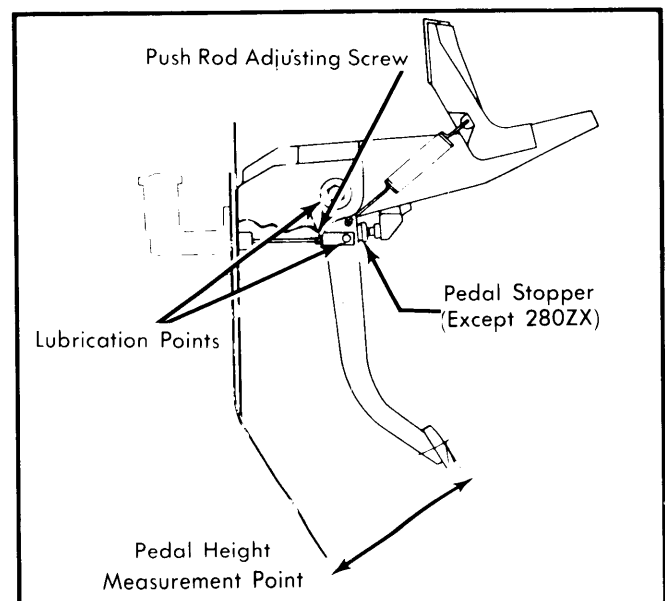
Clutch Pedal Height Measurement and Free Play Adjustment Locations
